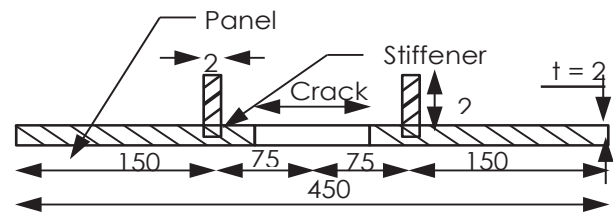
Cross sectional view of blade (straight) stringer with the panel
